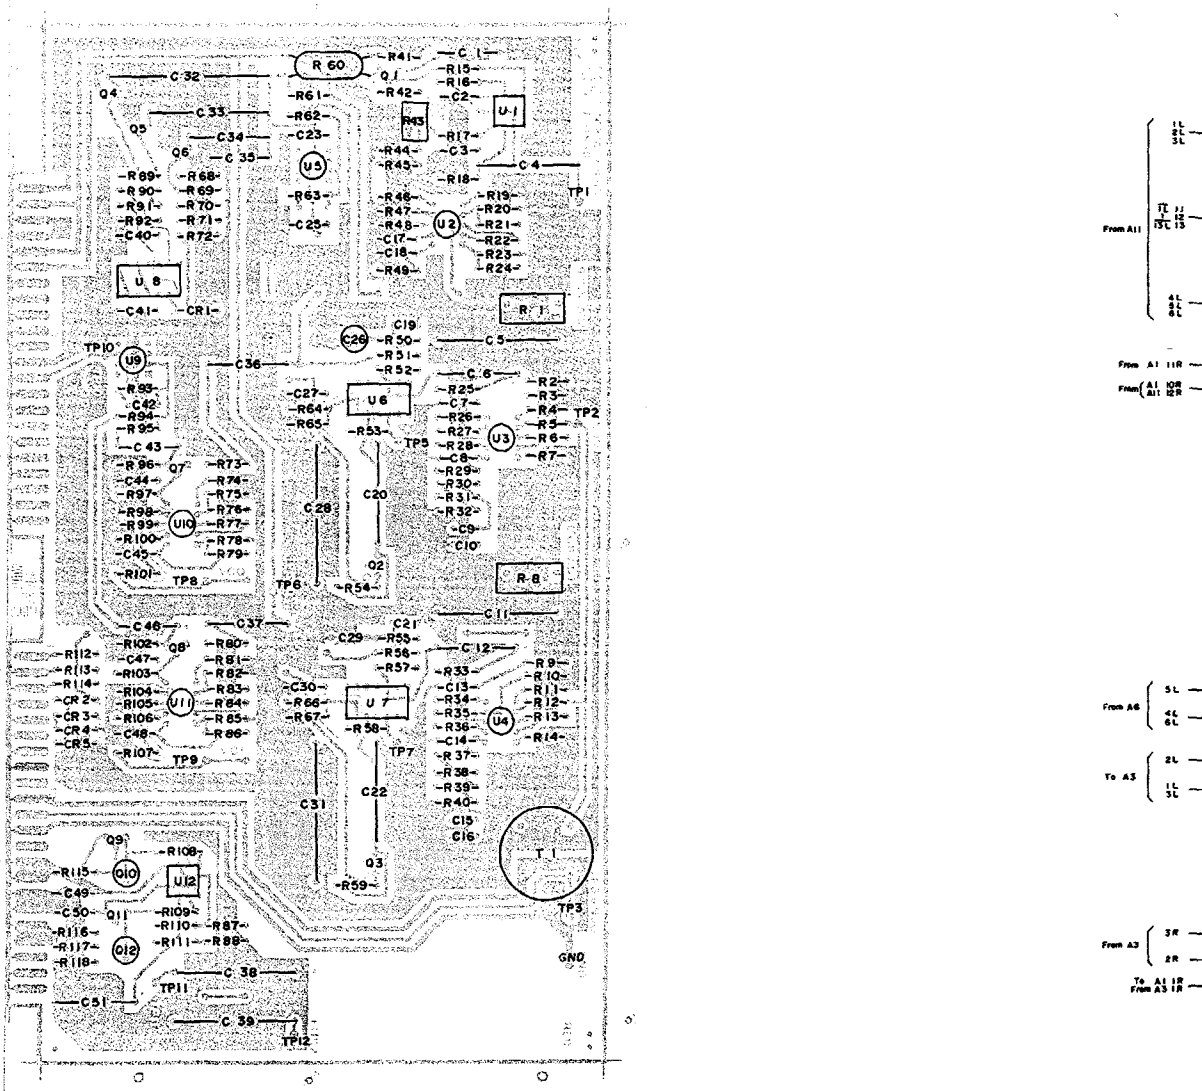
A2 MODULATOR ASSEMBLY COMPONENT LOCATIONS.
